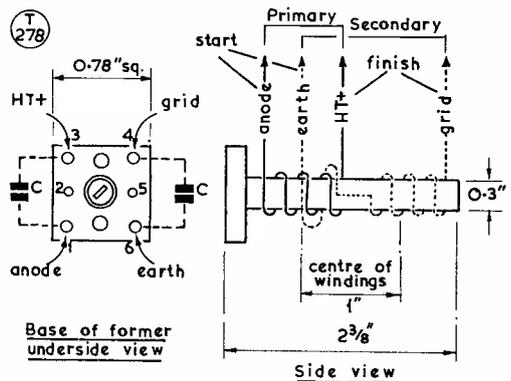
Dimensions of former and winding details for the wide band couplers described in the article.
